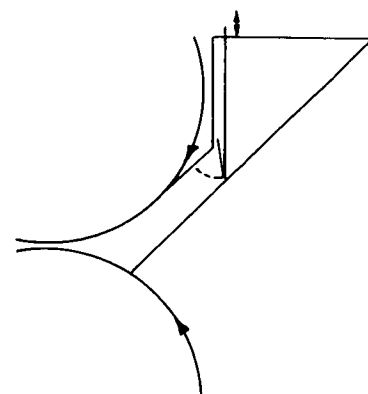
DIAGRAMMATIC ILLUSTRATION OF COMPACTING ROLLS AND POWDER-FEED HOPPER, SHOWING GUIDE-PLATE ASSEMBLY AND POWER-HEAD INDICATOR (REF. 161)
